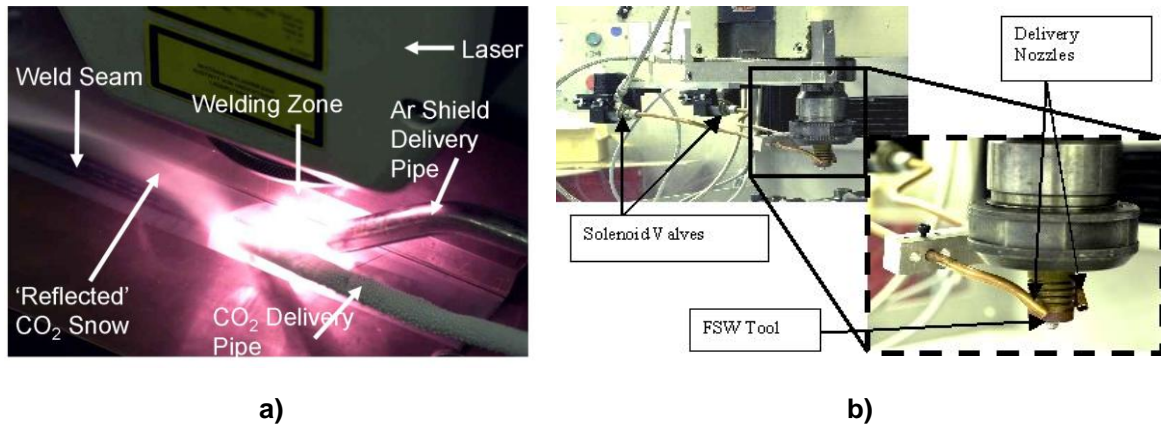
Topside CO₂ delivery devices developed for a) laser and b) Friction Stir Welding [14, 43]
